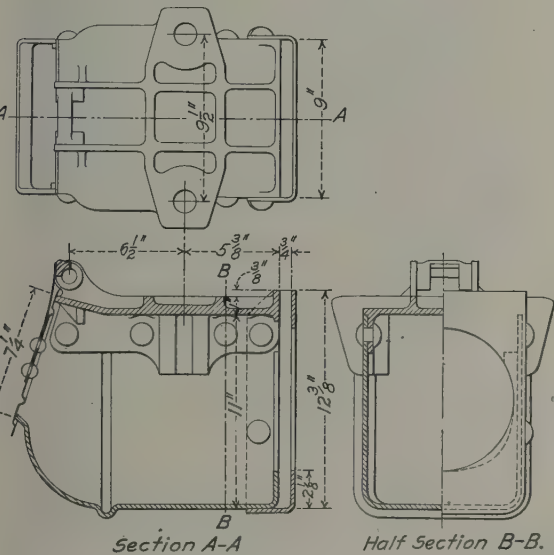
Kensington Steel Journal Box with Outside Lid Spring. Union Spring & Manufacturing Company.
